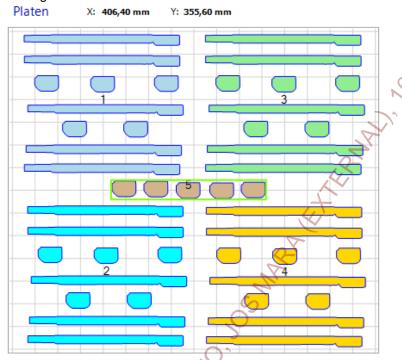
Print Job configurtion FLM material using smaller qualified machines
